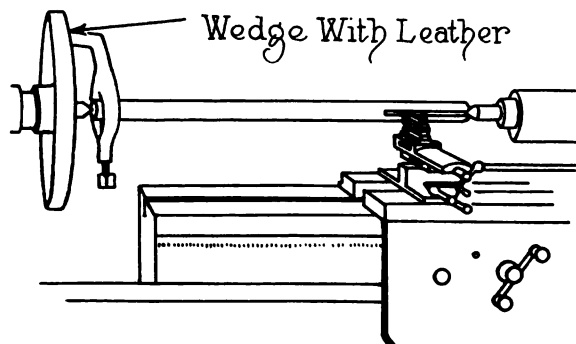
A Practical Substitute for a Milling or Shaping Machine.
